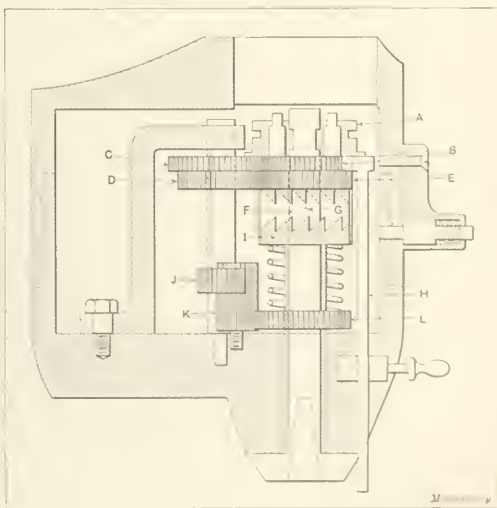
Arrangement of Forward and Reverse Gearing on Tapping Spindle
